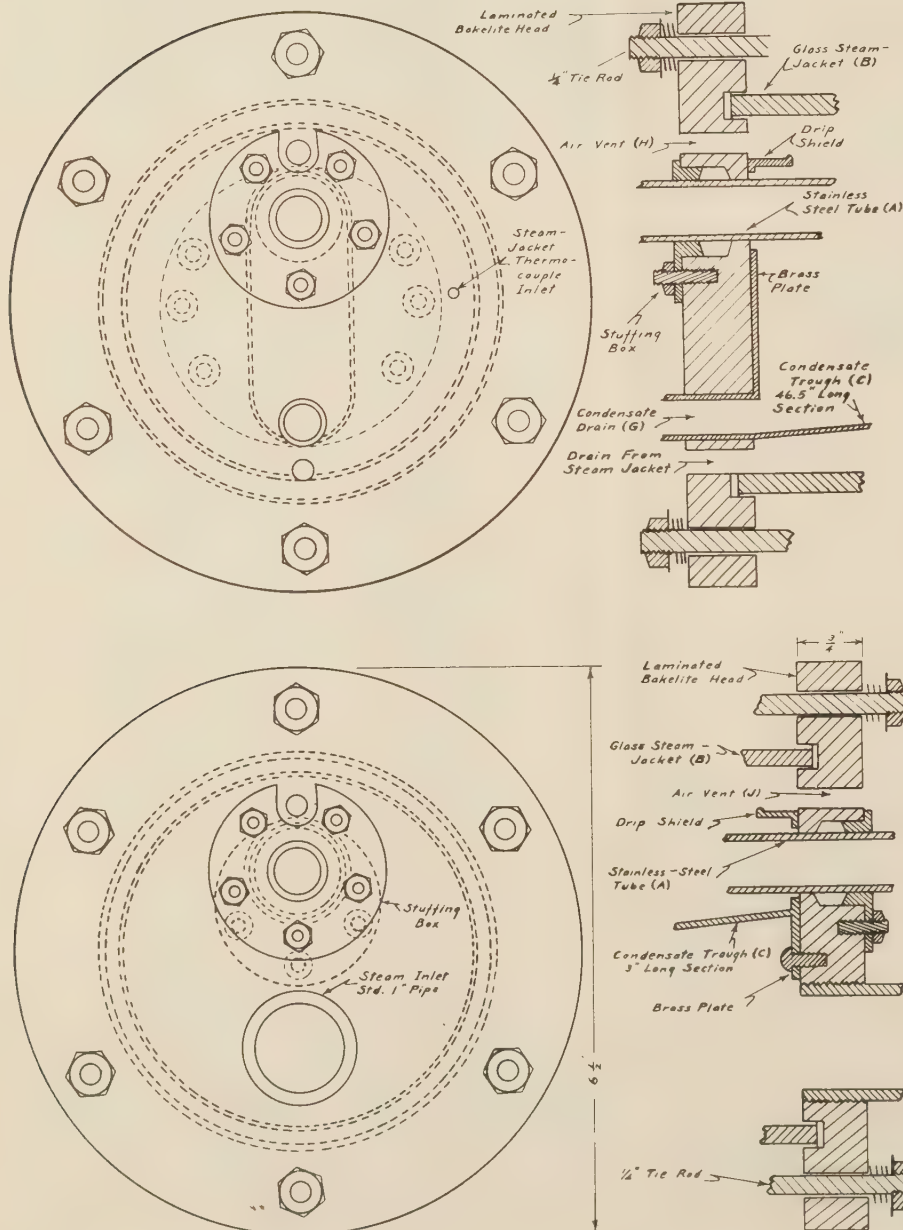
ASSEMBLY OF EXPERIMENTAL APPARATUS AT GAS-INLET END
